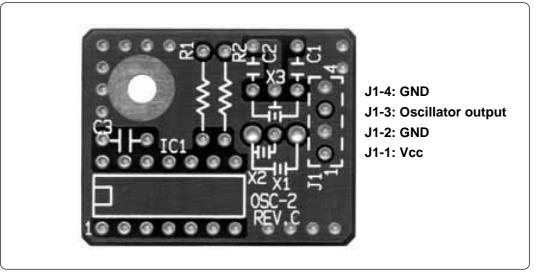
External view of the oscillator board (OSC-2) and connector pin assignments
